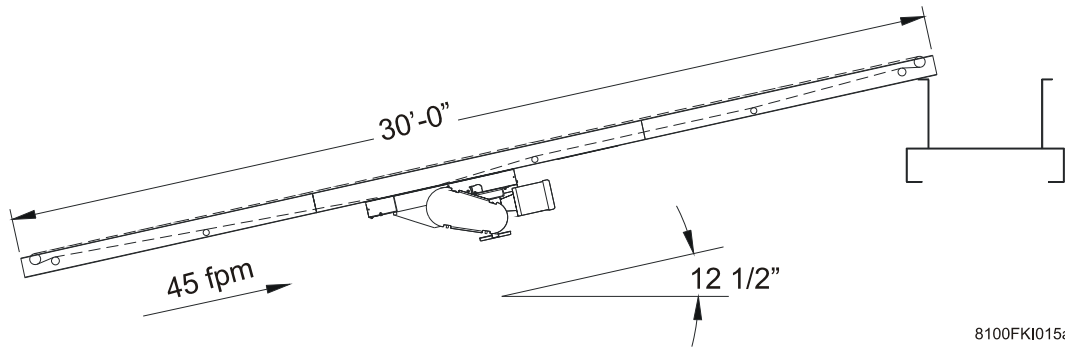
Style 4C, Inclined Feeder Conveyor
